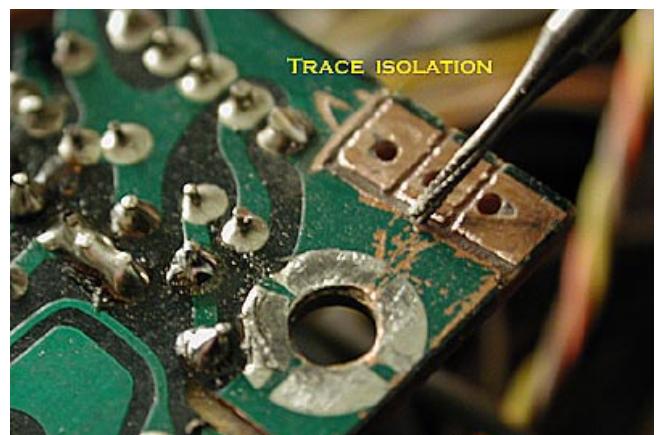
Scrape away the copper between each hole to make a solder pad for each leg/terminal of the 7808.
